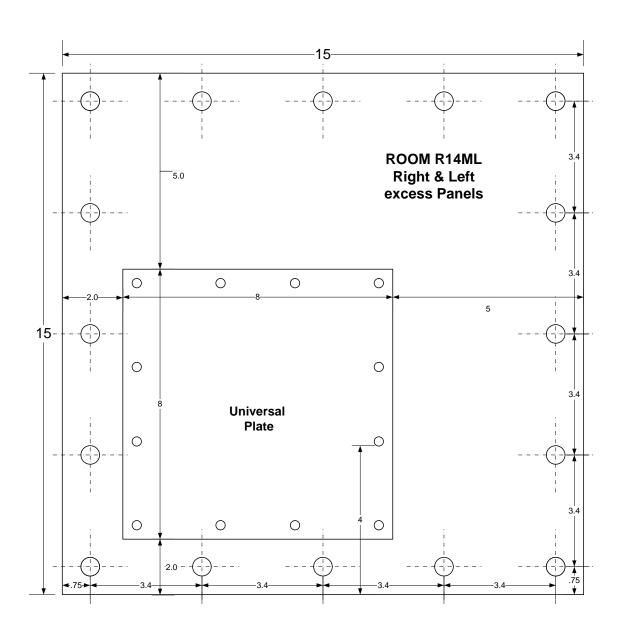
Room R14ML (Test Room) Mode Tuned Ground Plane (toward mounting plate interface)
